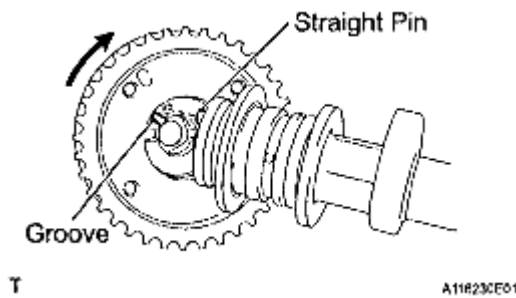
Identifying Camshaft Together With Straight Pin Of Groove
